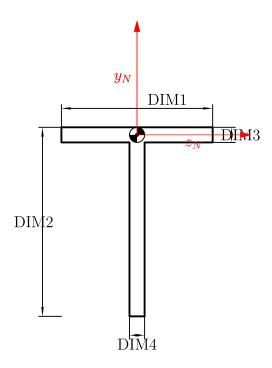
T: Cross section dimensions in a Nastran T profile section.
